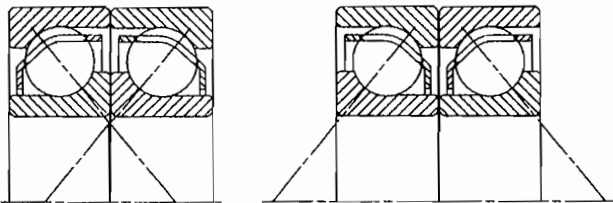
Back-to-Back (Right) and Face-to-Face (Left) Mounted Angular Contact Ball Bearings.
